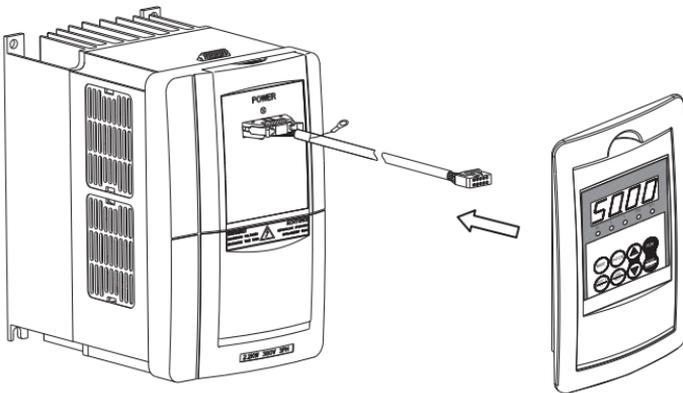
Mounting Diagram for the operator panel and connecting wire of the inverter Model A
